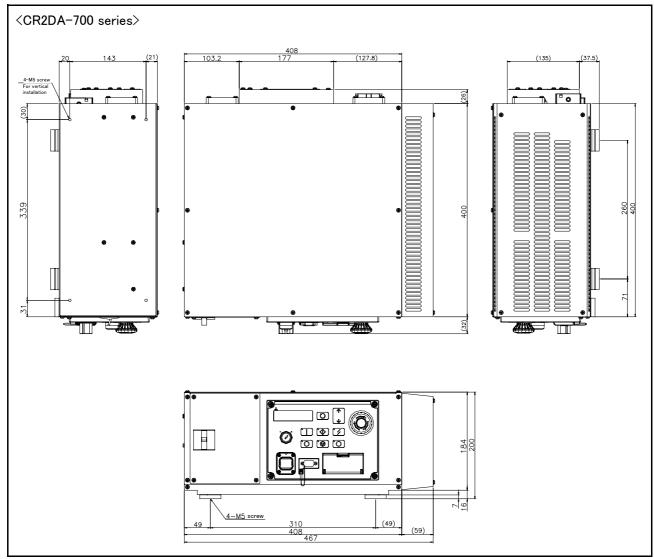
Outside dimensions of controller(CR2DA-700)
